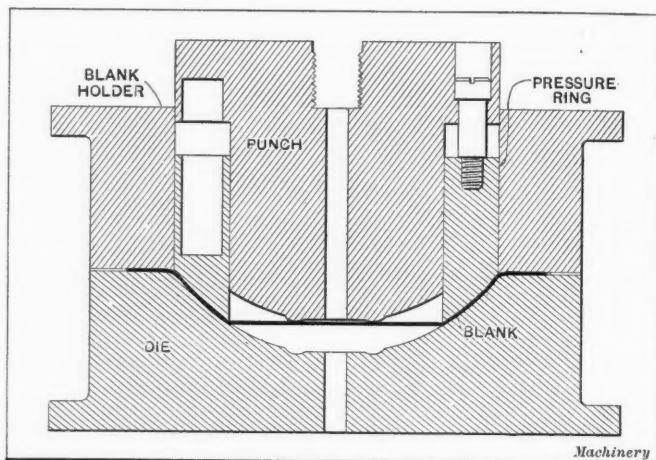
First Step in the Operation, the Pressure Ring drawing the Blank to the Form shown in Fig. 2
